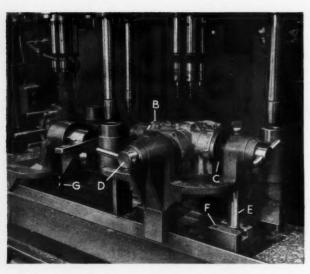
The leading jig of the pair on the closed-loop machine line. This jig provides for drilling and tapping operations on the small bearing boss at one side of the meter body, and the carbon deck face and flange on the opposite side
